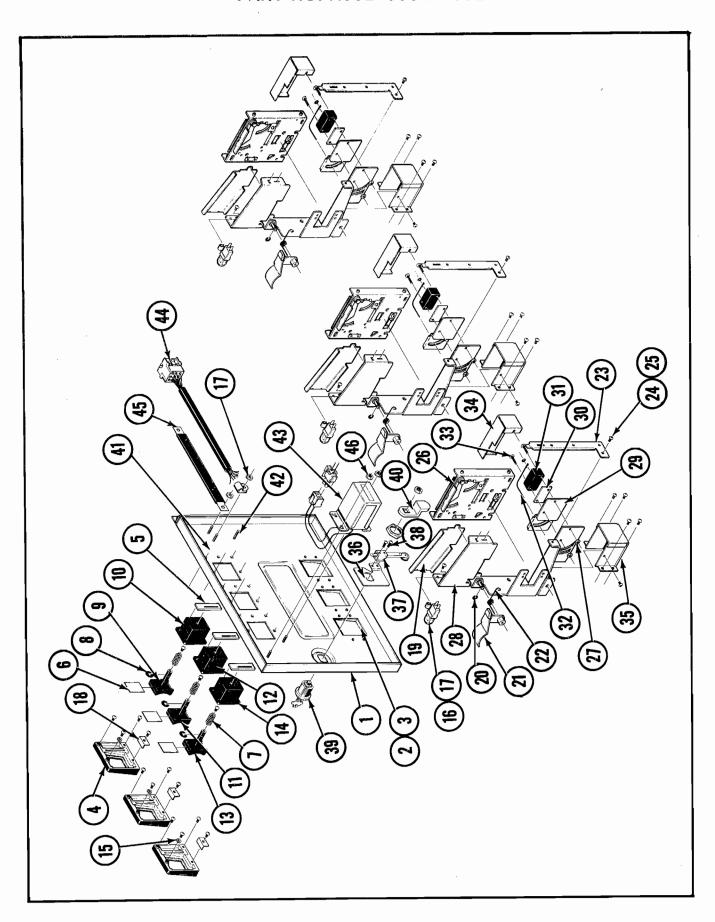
POWER CHASSIS: 130VA SWITCHING PART NO. A945-00059-0200
